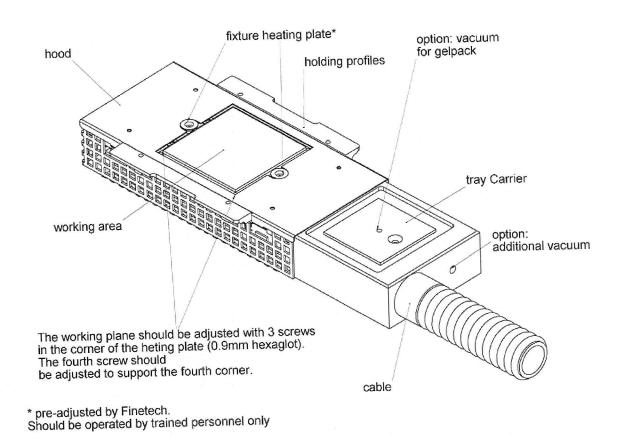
Heating Plate FA7C with vacuum holder for gel pack and additional vacuum
